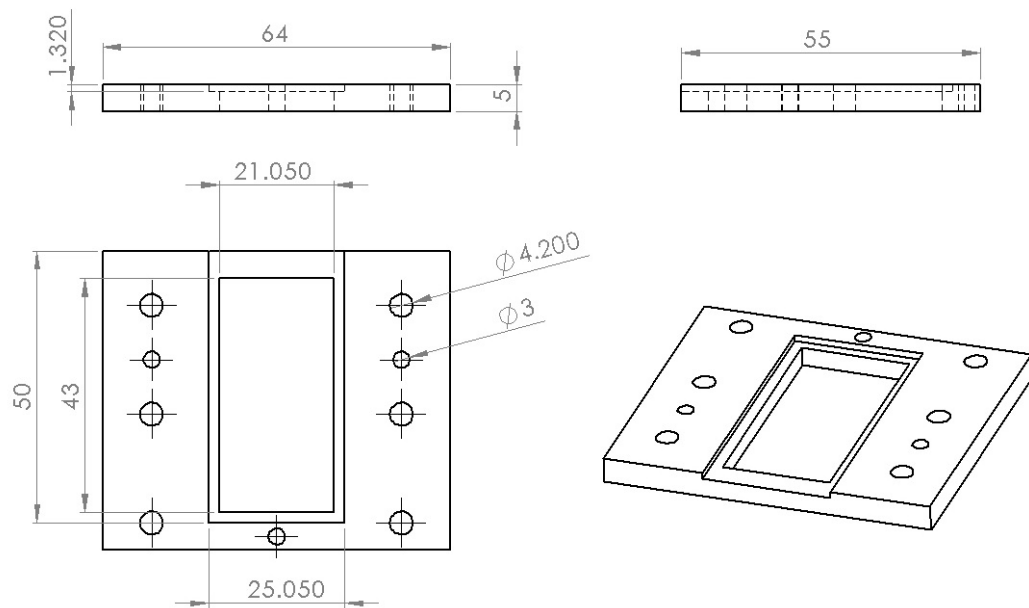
Drawings (front-top-right) of the sample holders (dimensions are in millimeter).
